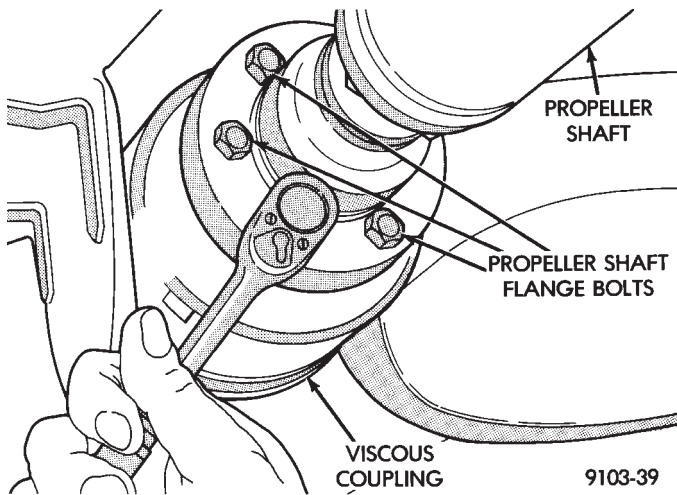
Propeller Shaft Mounting Bolts (Rear)
